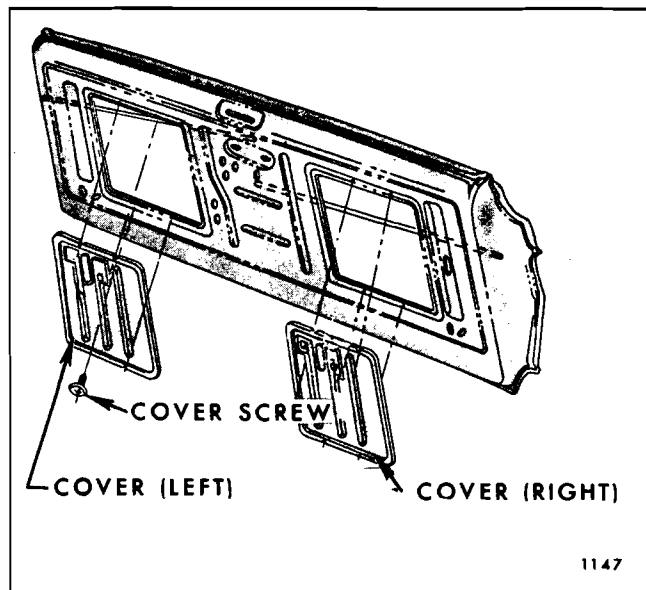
Tail Gate Inner Panel Access Hole Cover
